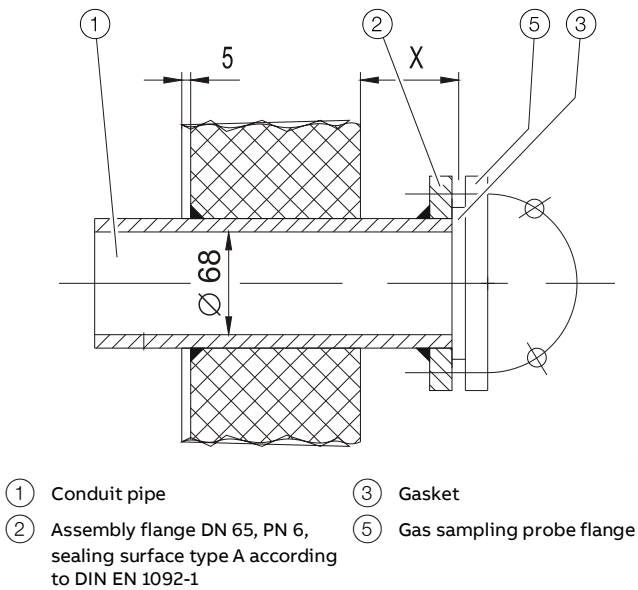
Installation of the conduit pipe in an insulated sheet-metal channel (dimensions in mm)
